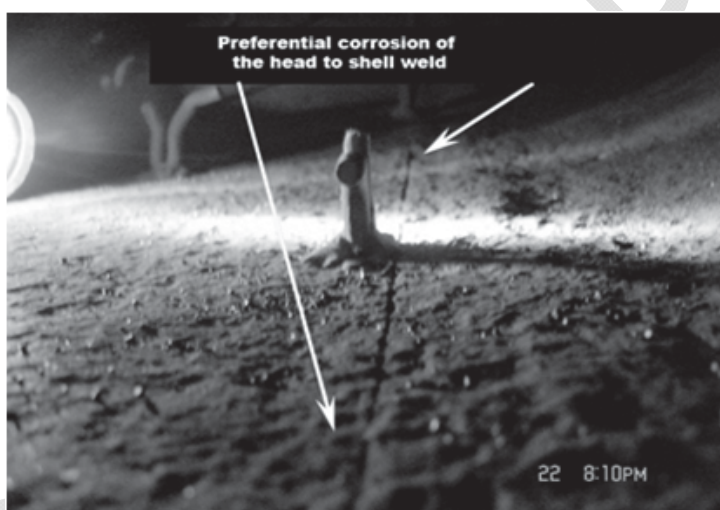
Preferential Corrosion of the Head-to-Shell Weld
